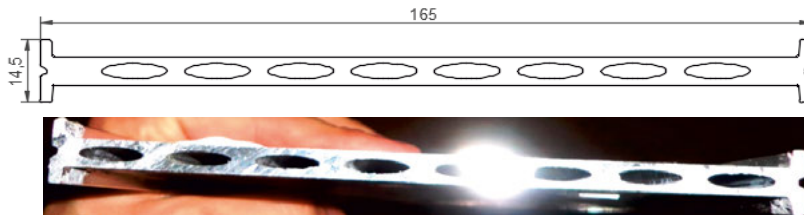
Side view of the receiver core with the elliptical channels. Dimensions in mm.
